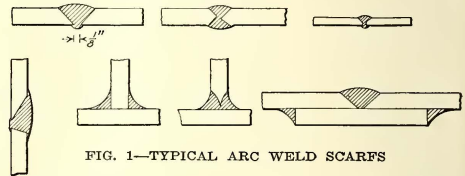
TYPICAL ARC WELD SCARFS
